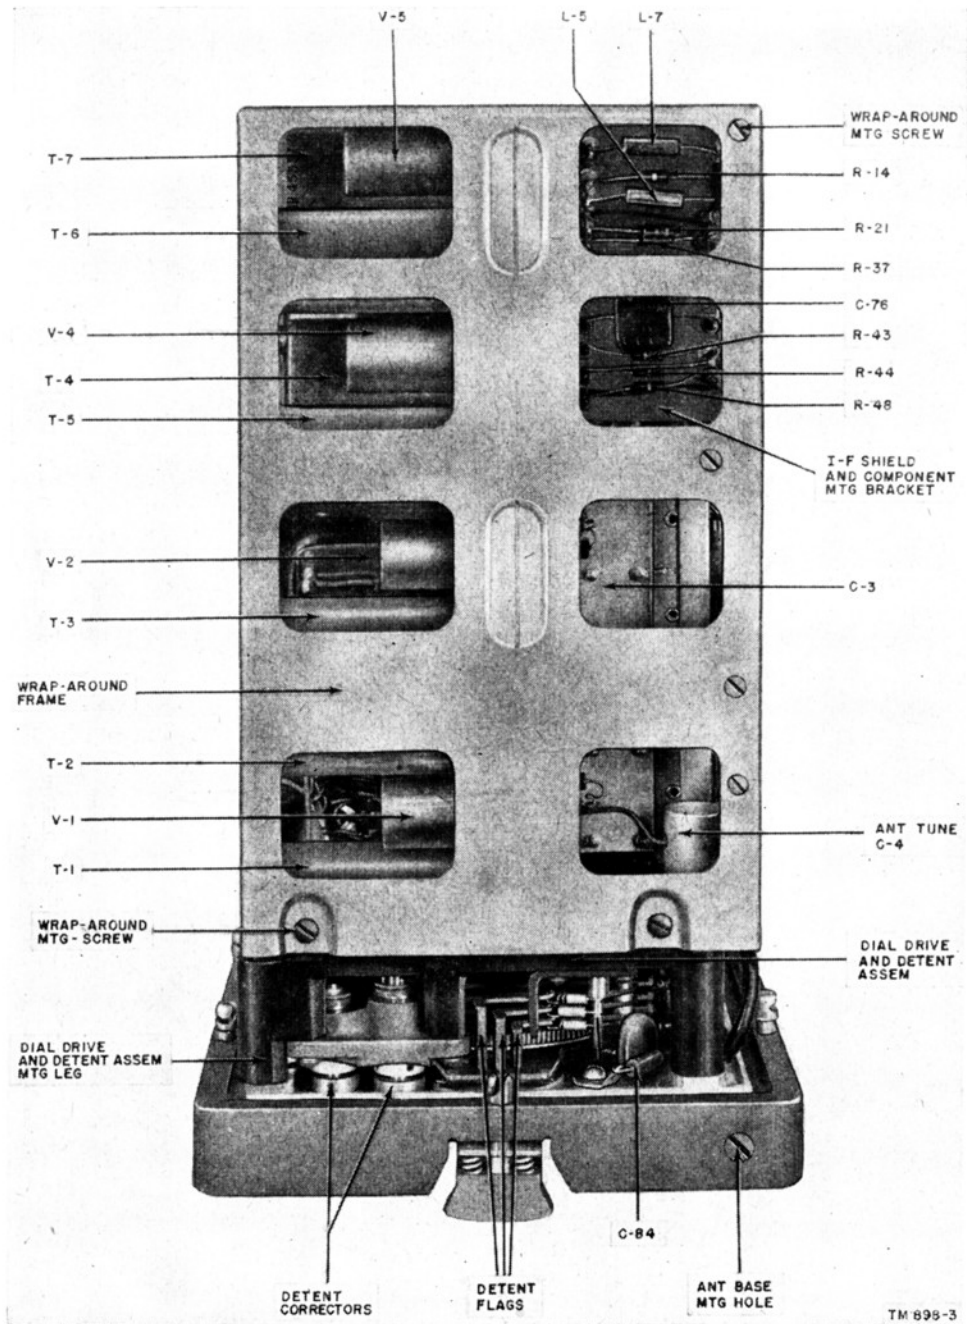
Typical radio receiver, case removed, top view of panel-and-chassis assembly.
